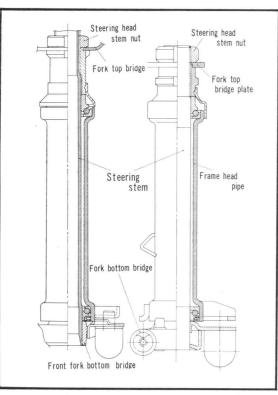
Steering stem sectional diagram (left C50, C65, right S65)
